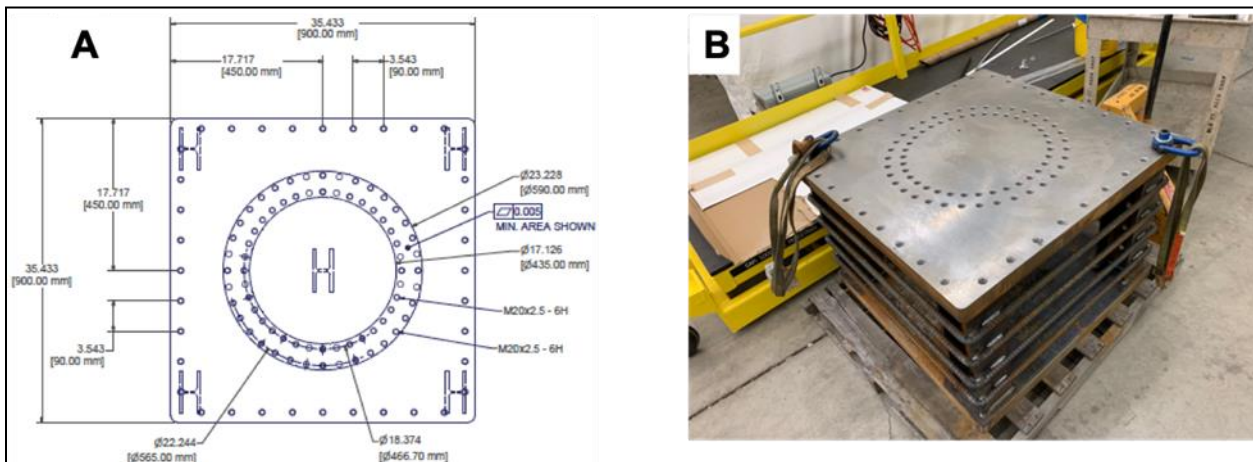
The design of the mounting plate and pad (A, left) and the corresponding assembly after welding and integration. The slewing bearing will be mounted on the circular bolt pattern.
